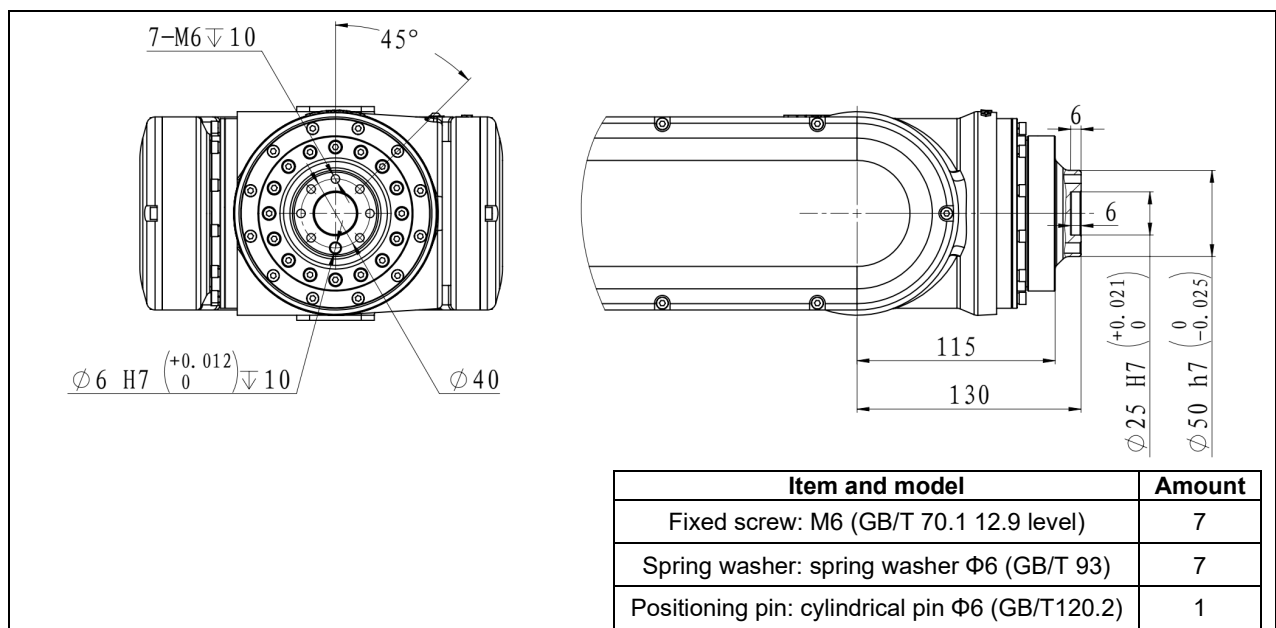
End flange mounting interface (ER35B-1810-LI, ER35B-1810)
